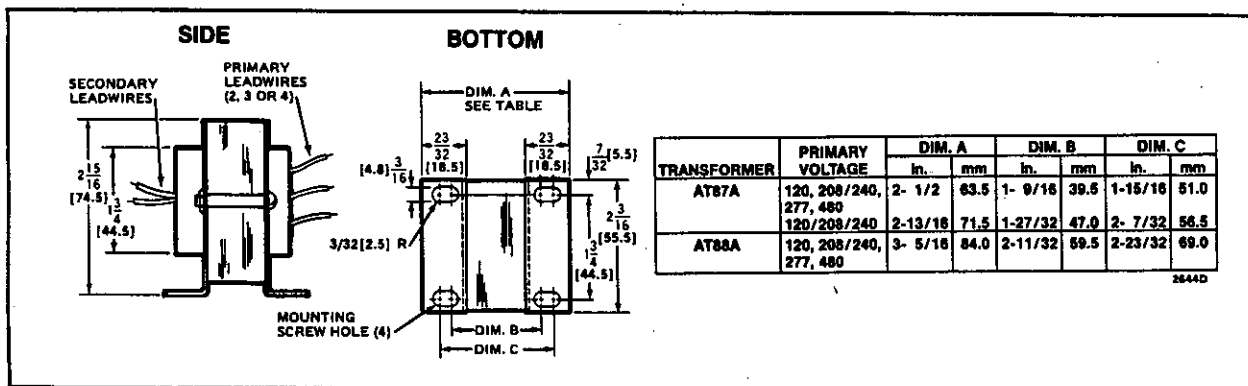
AT87A, AT88A (FOOT MOUNTED) DIMENSIONS IN in. [mm IN BRACKETS].
